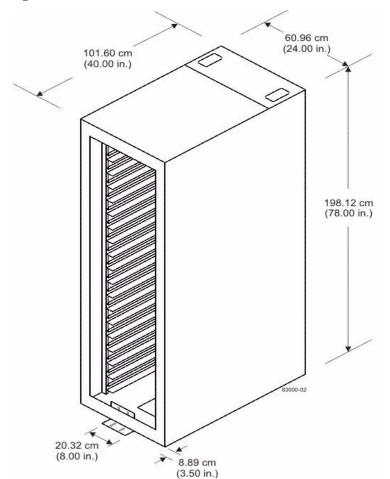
Dimensions of the Model 3040 40U Cabinet – Front View
